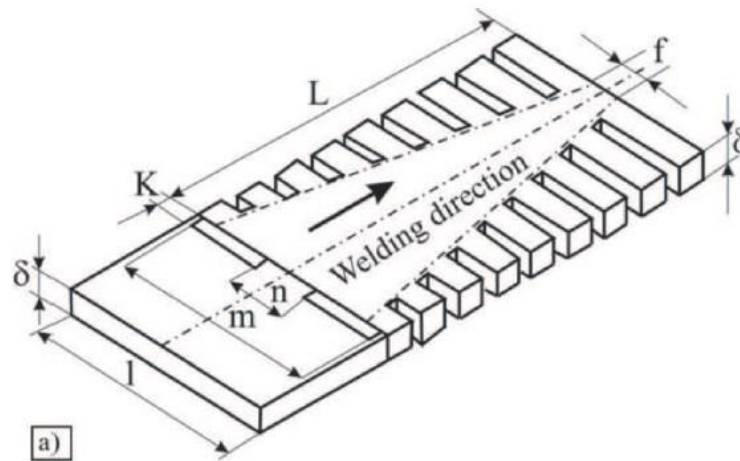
Dimensions of the Houldcroft sample of magnesium alloy used by Ademaic [28].
